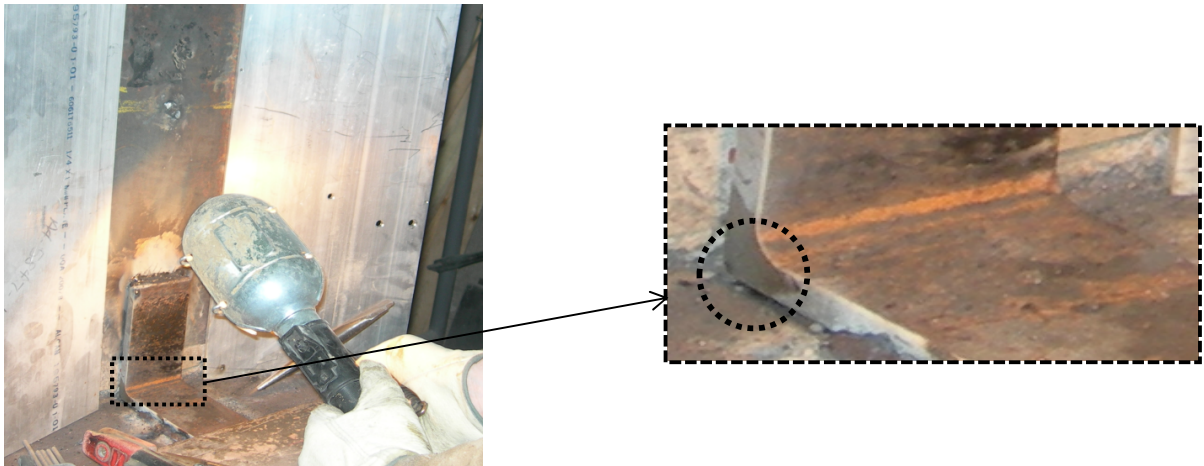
Gap formed in the bottom corner of angle after welding is completed.
